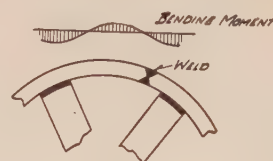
WELD IN ROTOR RIM LOCATED AT POINT WHERE BENDING IS ABSENT
